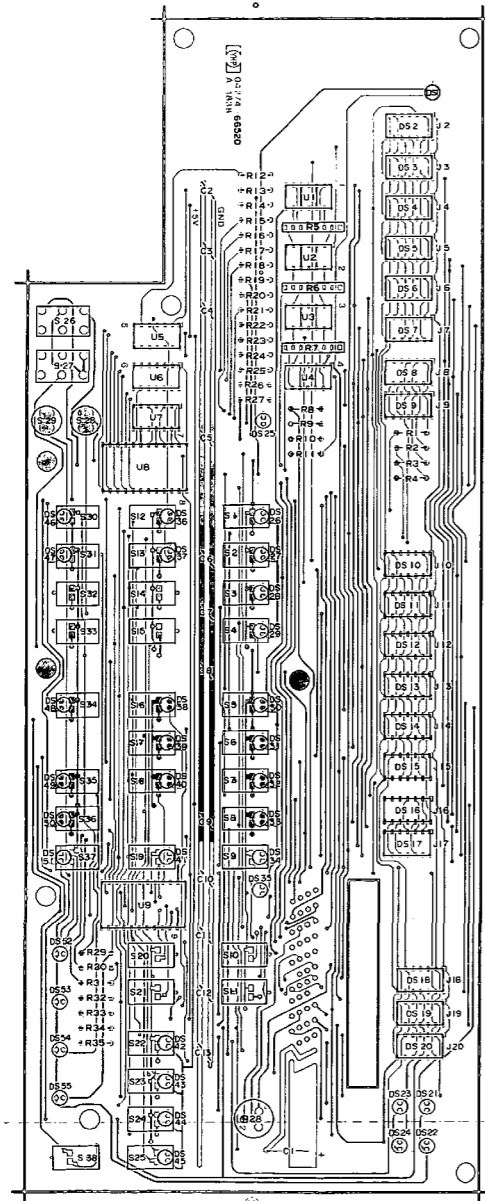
A10 DISPLAY AND KEY ASSEMBLY COMPONENT LOCATIONS.
